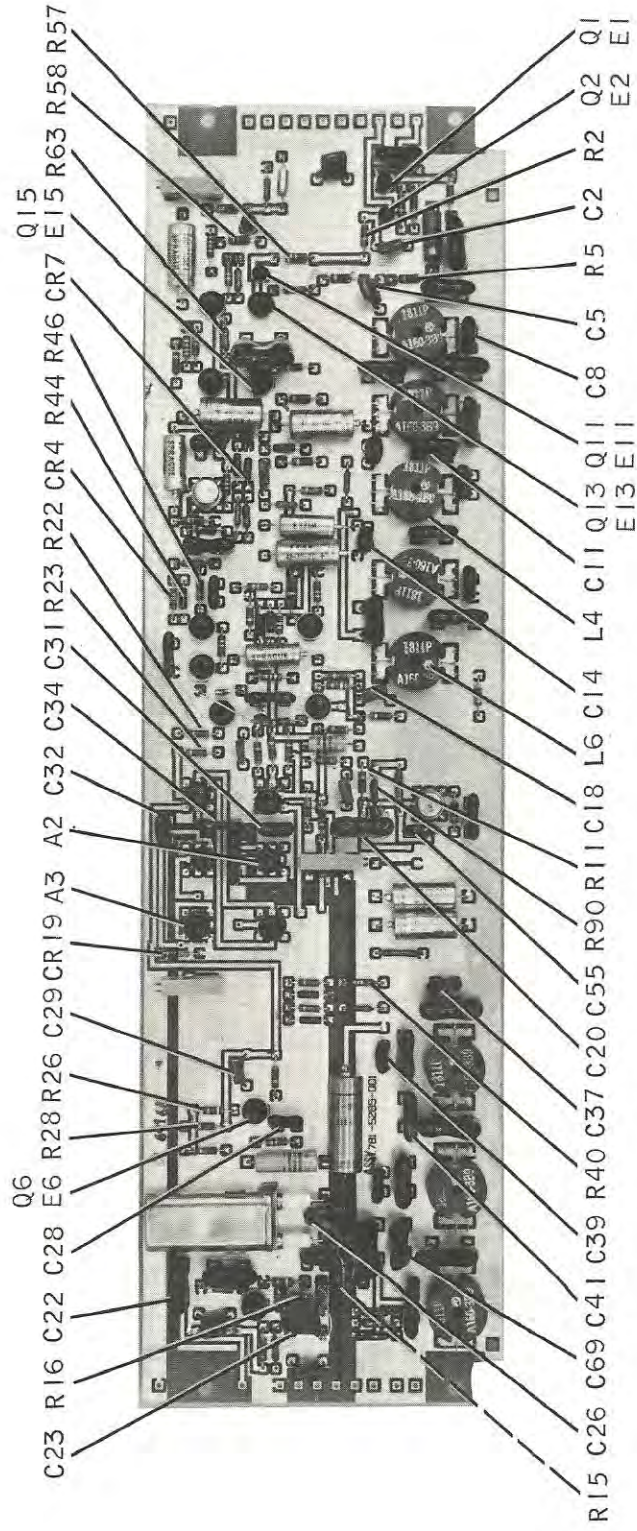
Printed Circuit Board (Sheet 2 of 5).
